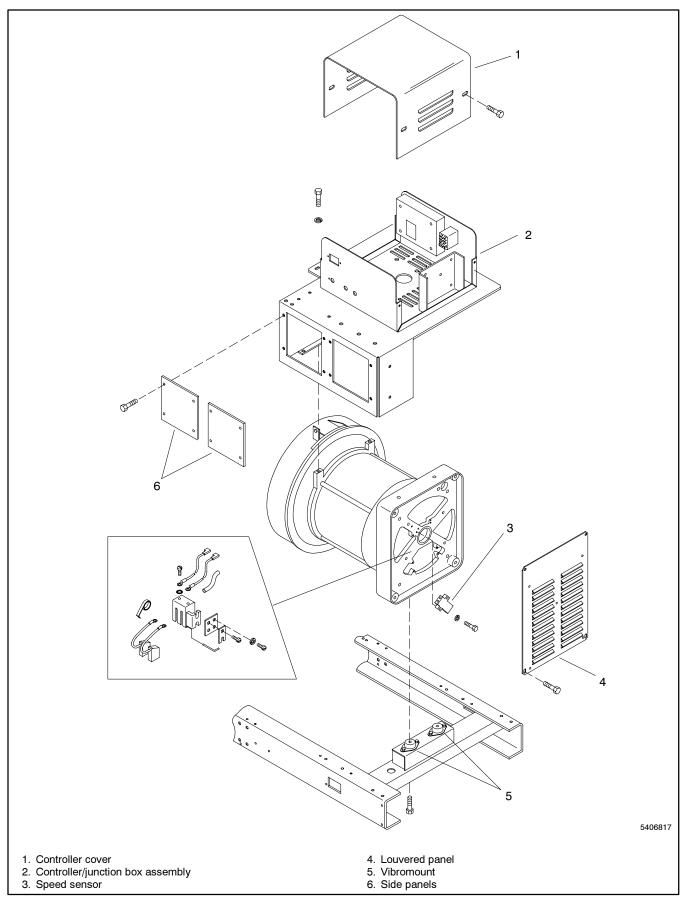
Removing Controller/Junction Box and Louvered Panel
